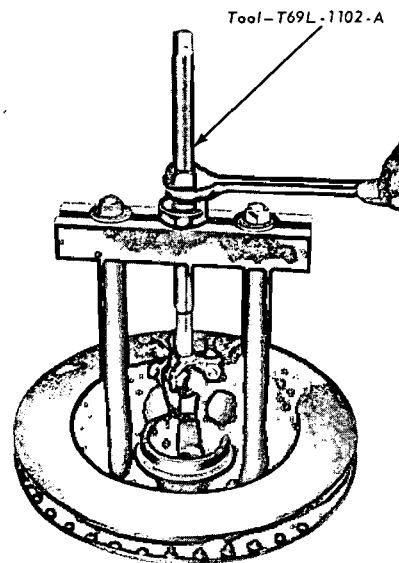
Removing Front Wheel Bearing Cups—Disc (Drum-Type Similar)
